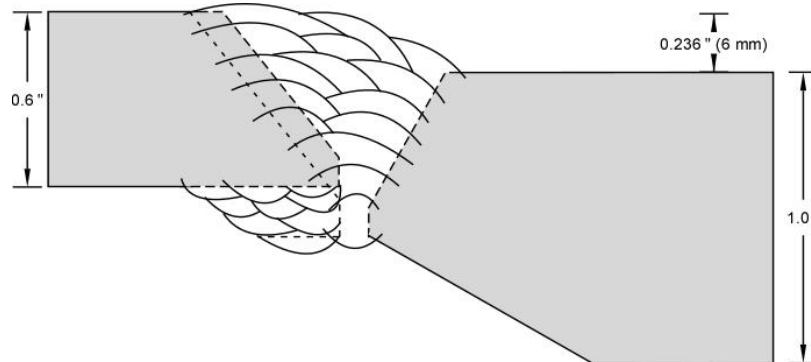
Example of unequal wall thickness joint with 6mm misalignment addressed using weld metal buildup option
